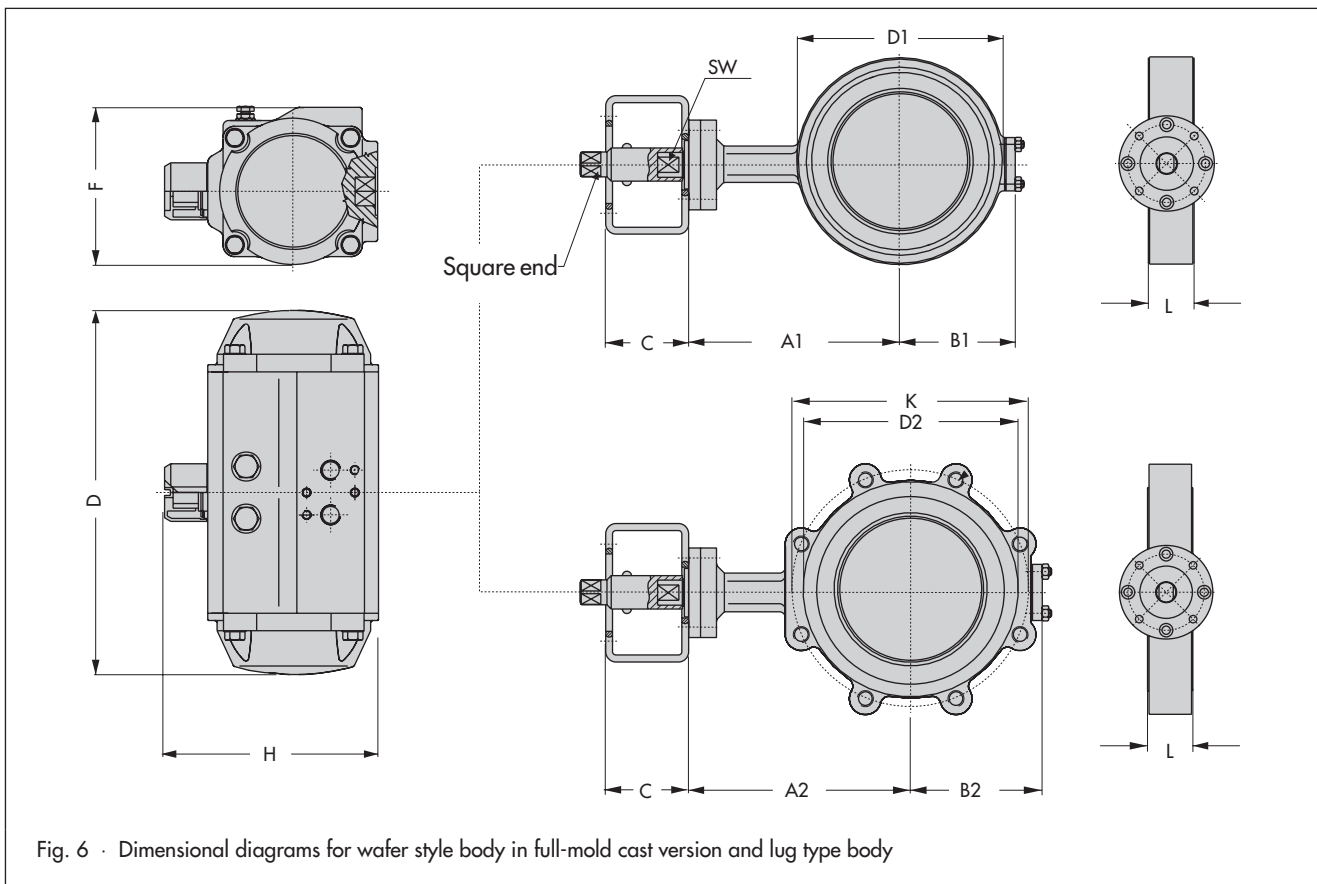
· Dimensional diagrams for wafer style body in full-mold cast version and lug type body
